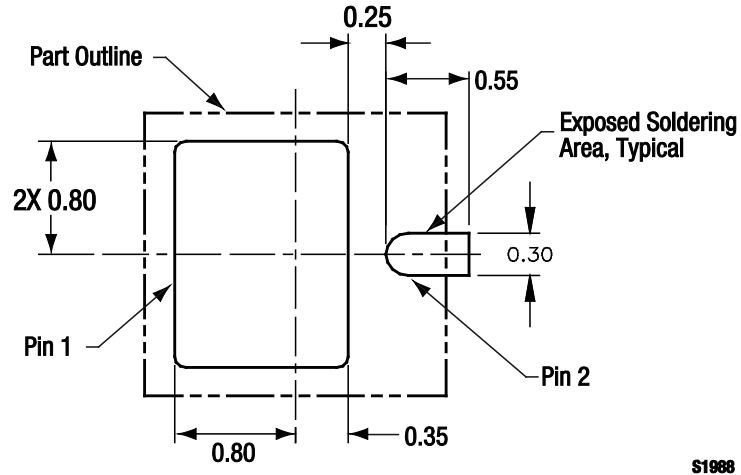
SKY1345-087LF PCB Layout Footprint (Top View)
